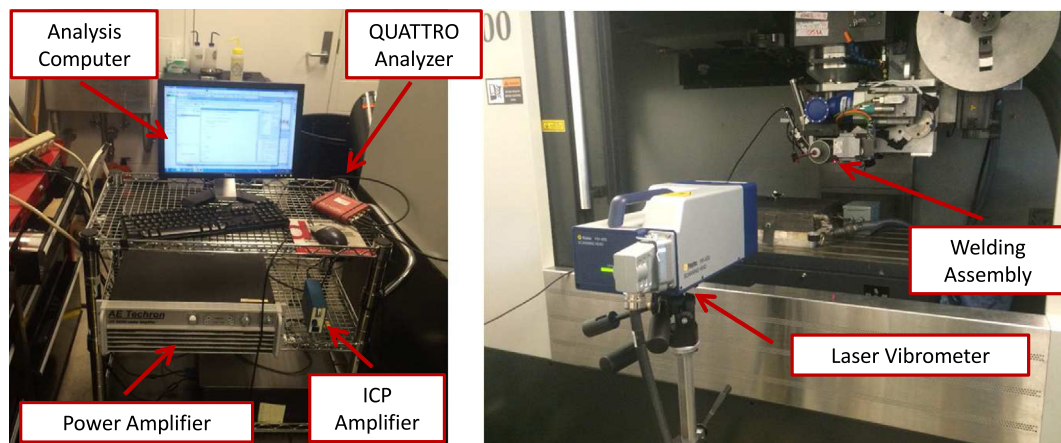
Approach and equipment used to measure experimental FRF measurements of weld assembly. Characterization was done inside the UAM machine to emulate operating boundary conditions.
